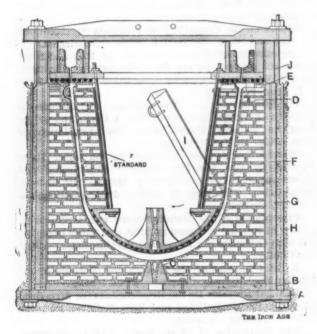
Sectional View of Mold for Making Large Kettle, Pine. &c.
